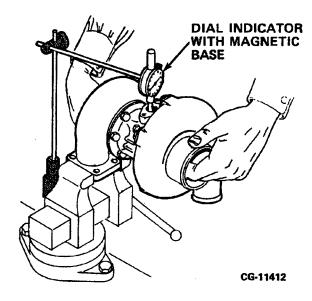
Checking Radial Shaft Movement with Housing Installed
